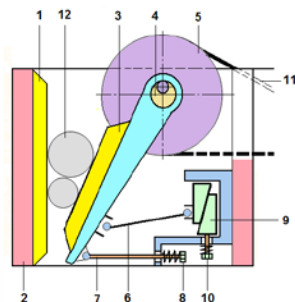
Jaw crusher: 1 – fixed crushing jaw; 2 – framework; 3 – moveable crushing jaw; 4 – eccentric shaft; 5 – flywheel; 6 – safety lever; 7, 8 – the bar; 9, 10 – adjustable wedge system; 11 – belt drive; 12 – material for crushing.
